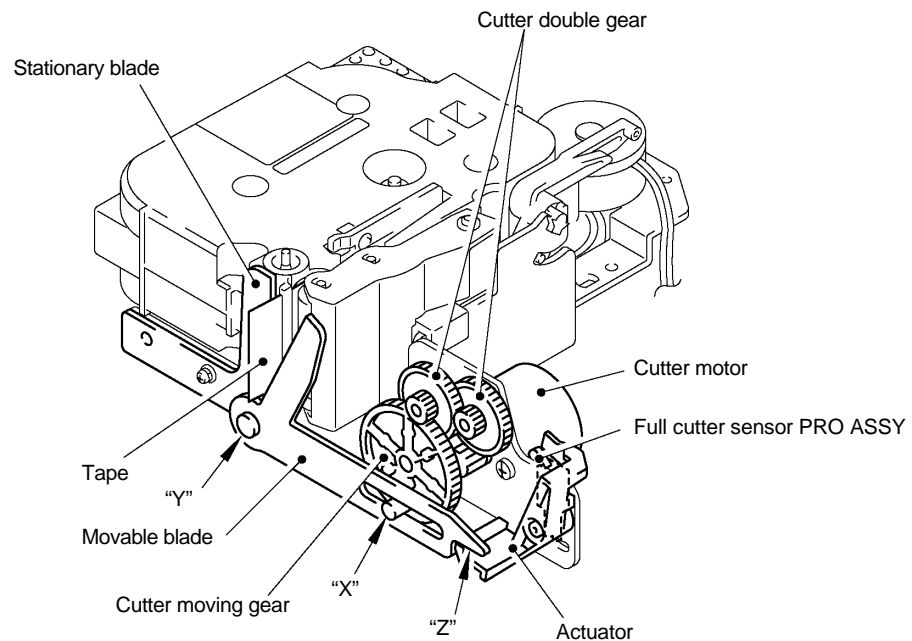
Automatic Tape Cutter Mechanism (PT-1900/1910)
